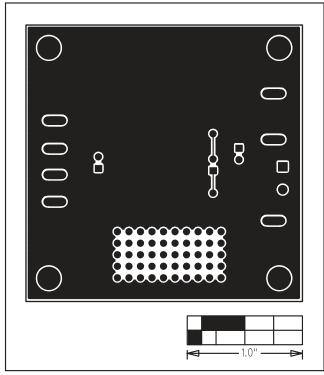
MAX13485E EV Kit PCB Layout—Solder Side
